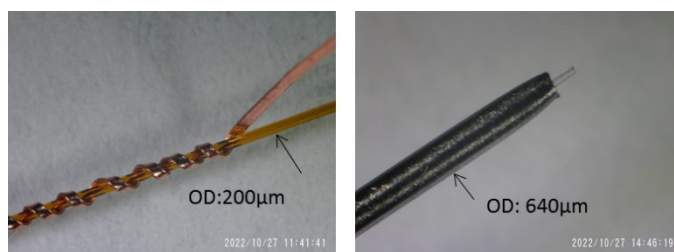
Image of the copper coil that center the inner tube of the nozzle.
